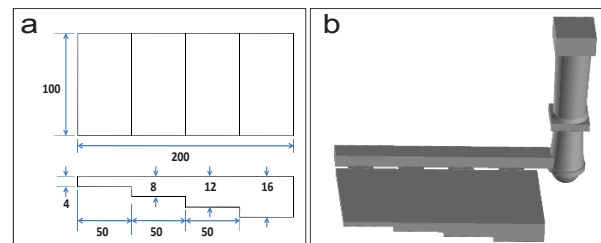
(a) Details of the step casting, (b) 3D model of step casting
